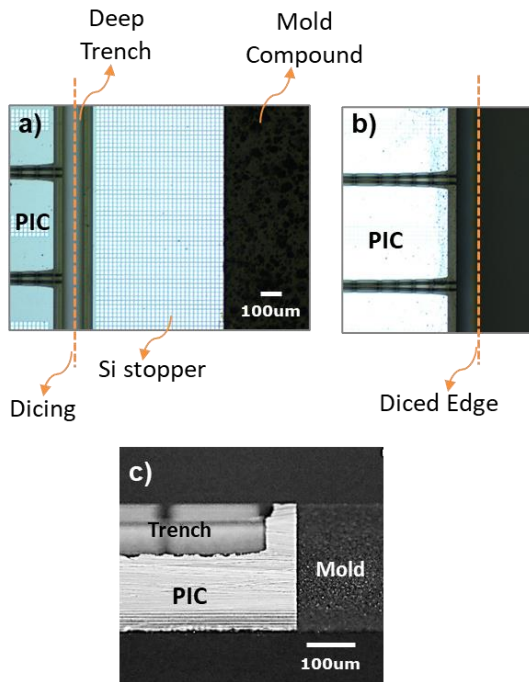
Images showing the PIC embedded inside the mold a) top view after molding, b) top view, diced molded sample to expose the optical couplers and c) cross-sectional view after dicing through the trench.
